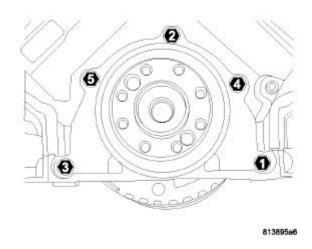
REAR SEAL RETAINER TORQUE SEQUENCE Courtesy of CHRYSLER LLC
